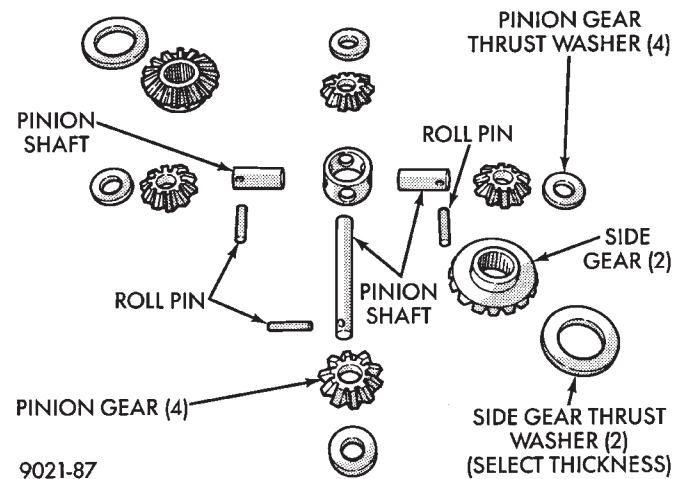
Remove or Install 4 Pinion Gears and 2 Side Gears
